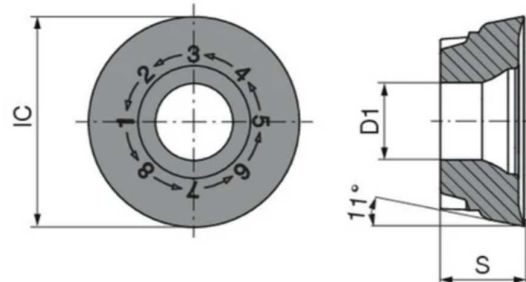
Round cutting tool insert for implement the unconventional cutting scheme
